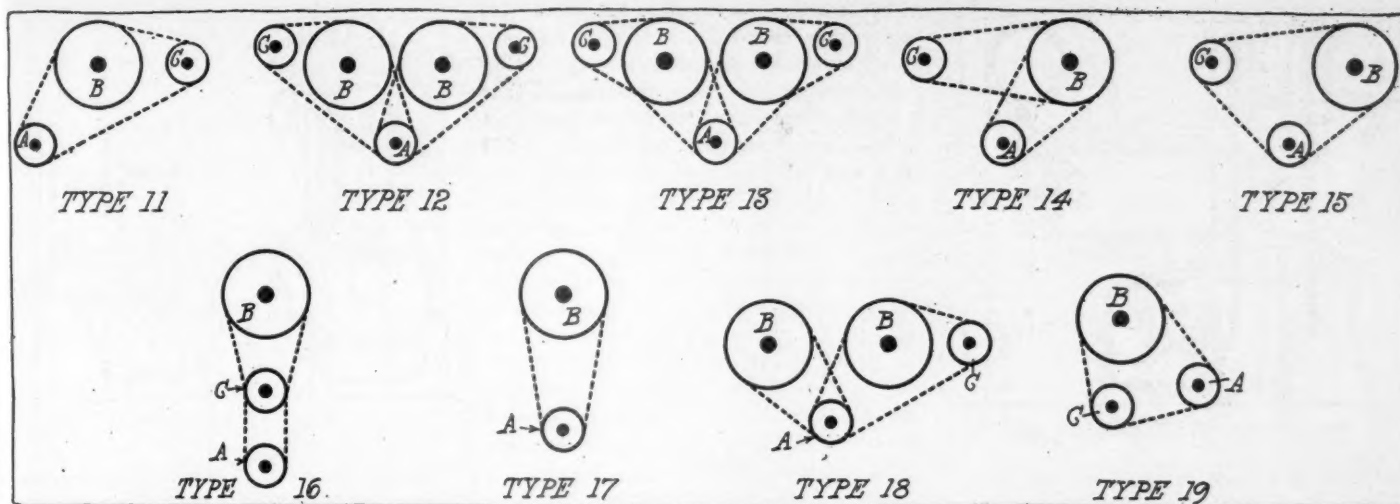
LEADING ARRANGEMENTS OF SILENT CHAINS FOR MOTOR USE ON ENGLISH CARS
